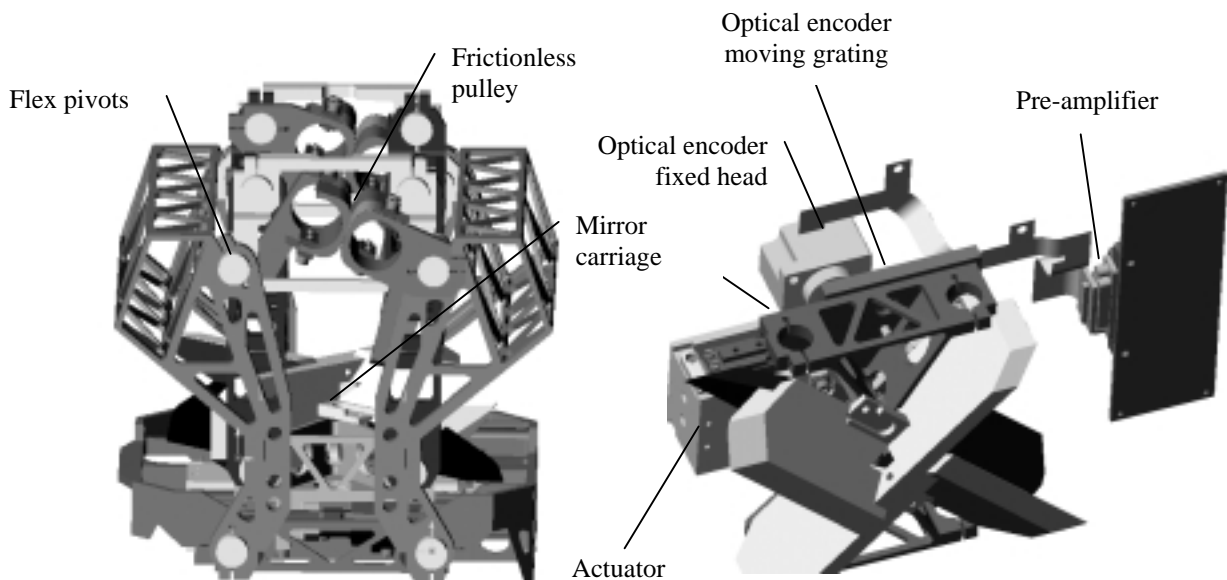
Two views of the flight design of the mirror drive mechanism. On the left the complete assembly is shown with the flex pivots and frictionless pulley system. On the right the upper structure is removed to show the optical encoder and linear actuator positions.
